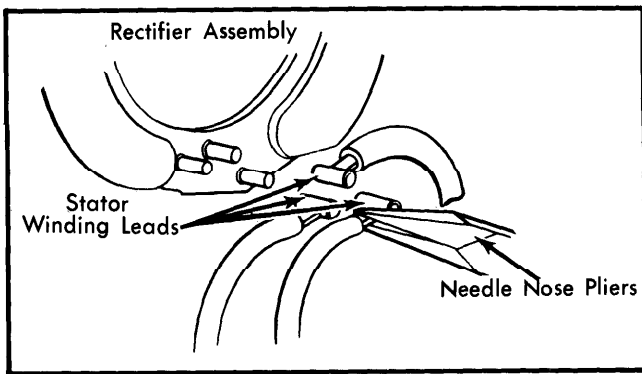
Installing Stator Leads on Rectifier Pins (65 Amp. Alternator)
